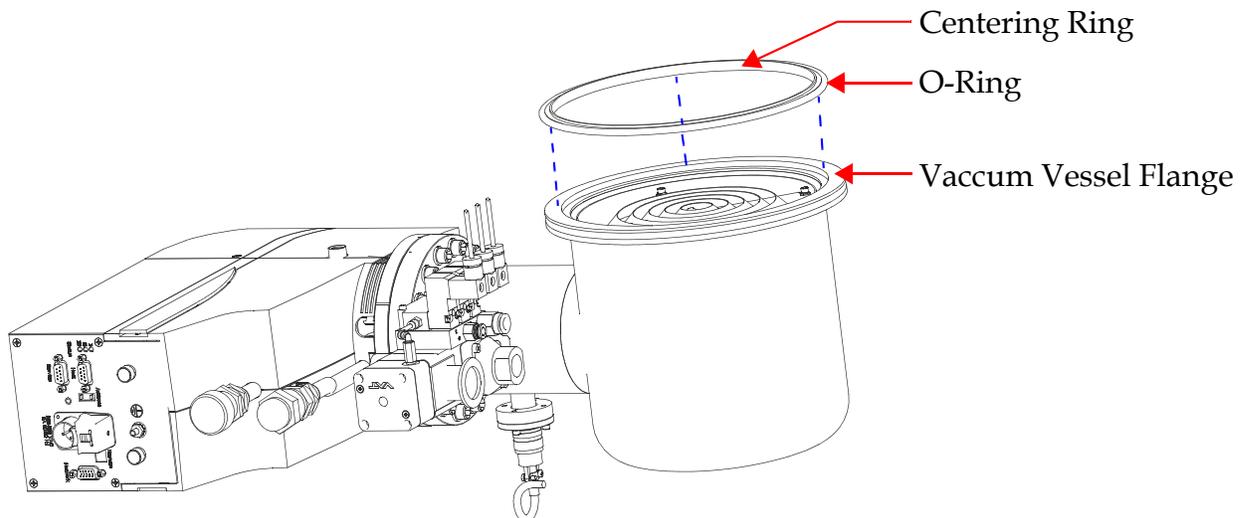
Centering Ring and O-Ring for Cryopump Attachment
